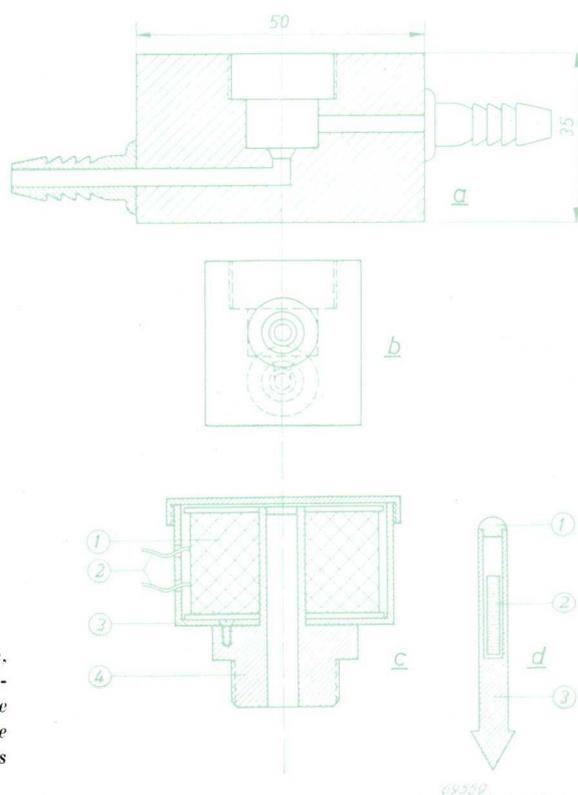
Cross sectional drawings of the solenoid valve. a and b — the plexi-glass holder; c the screw cap where in 1 — the winding; 2 — the connection leads; 3 — the iron housing; 4 — the screw nut; d — the plug; 1 — the top plug; 2 — the loose iron core and 3 — the plexi-glass plug.
